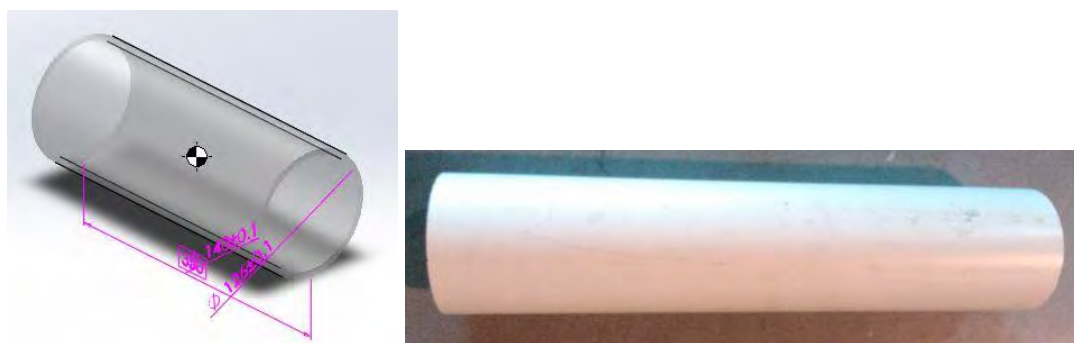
Cylindrical hull (Design & PVC pipe)
